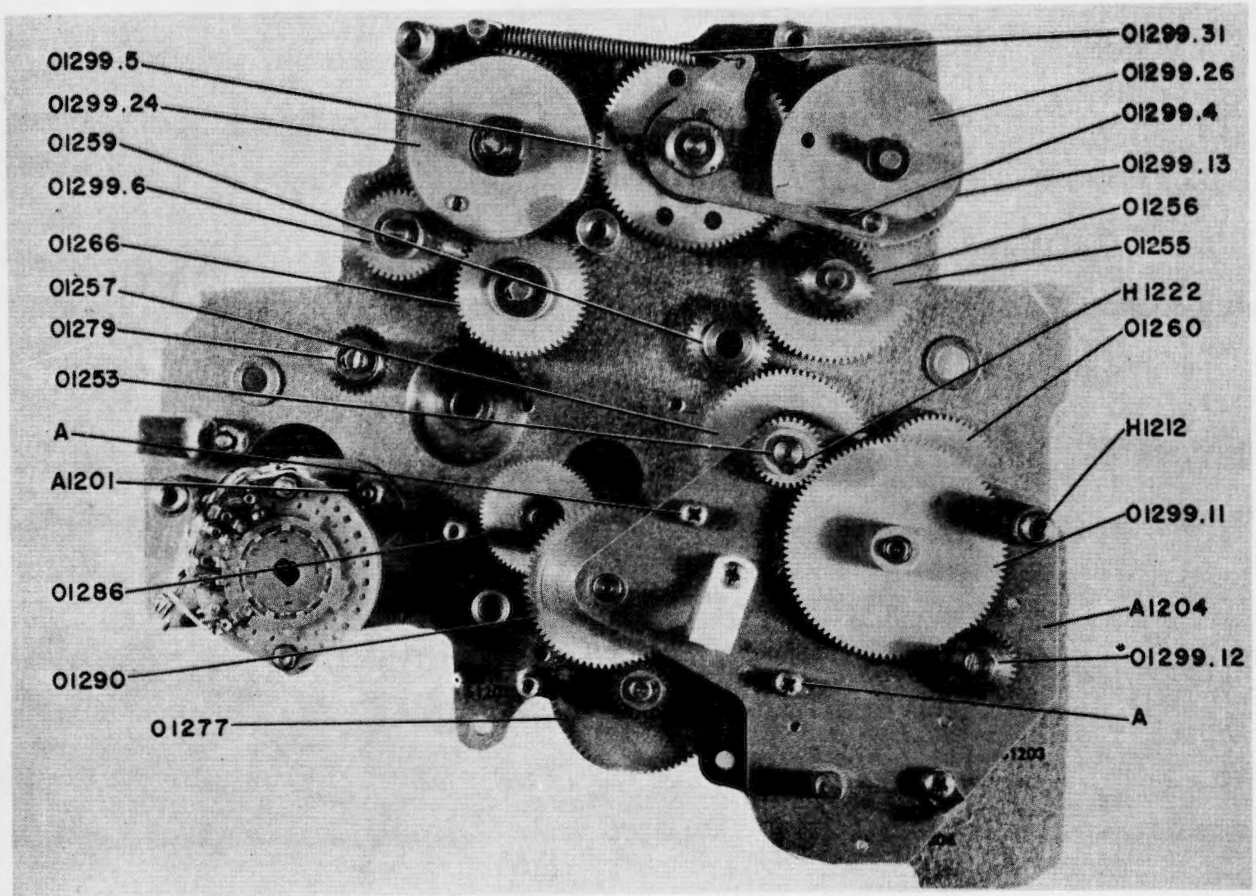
RT-581A/URC-9, Frequency Selector, Front View of Rear Plate
